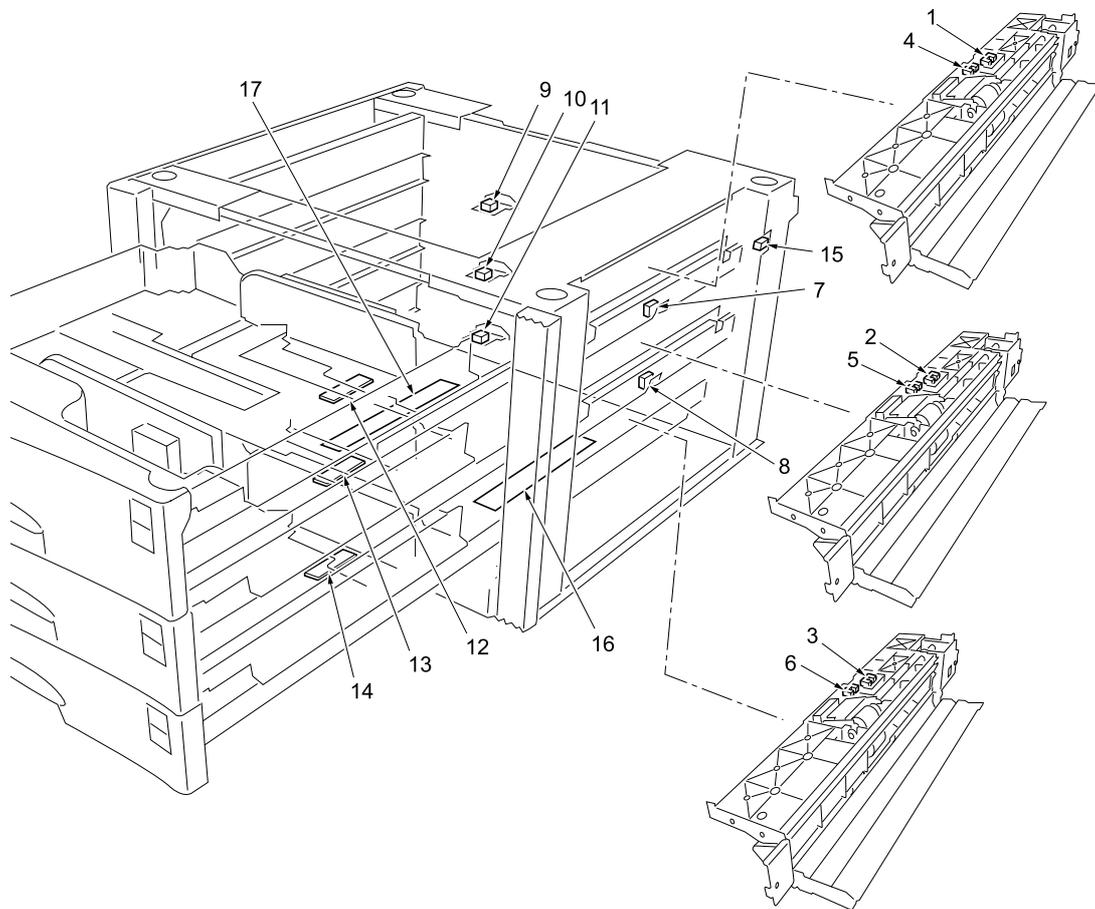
Paper feeder inside and primary paper feed unit
